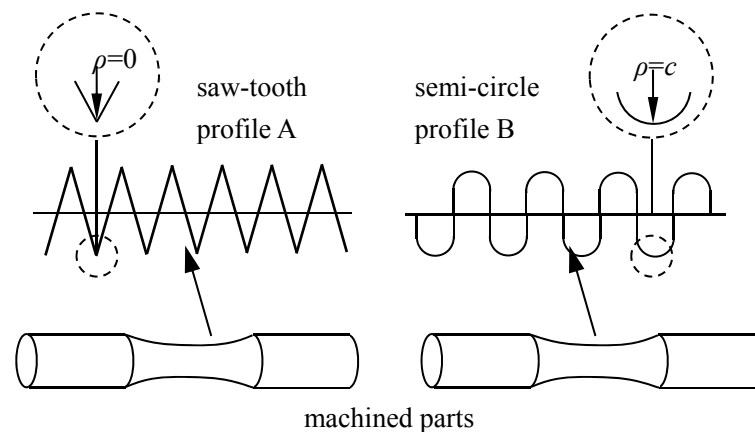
The saw-tooth and semi-circle surface profiles for machined parts
